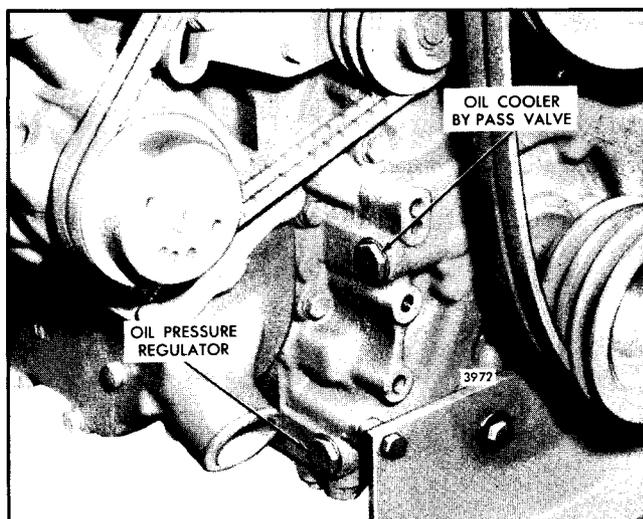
Location of Former Oil Pressure Regulator Valve (6V Engine)
